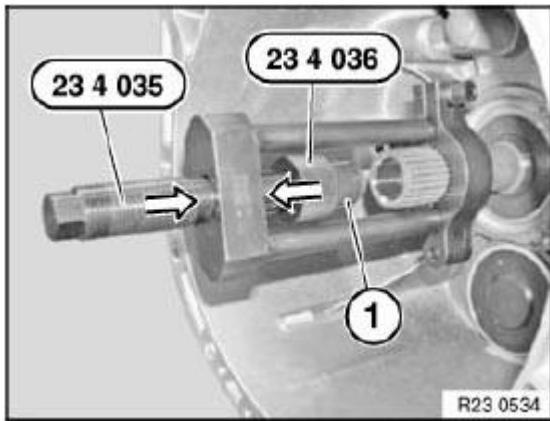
Identifying Special Tools (23 4 035) And (23 4 036)
